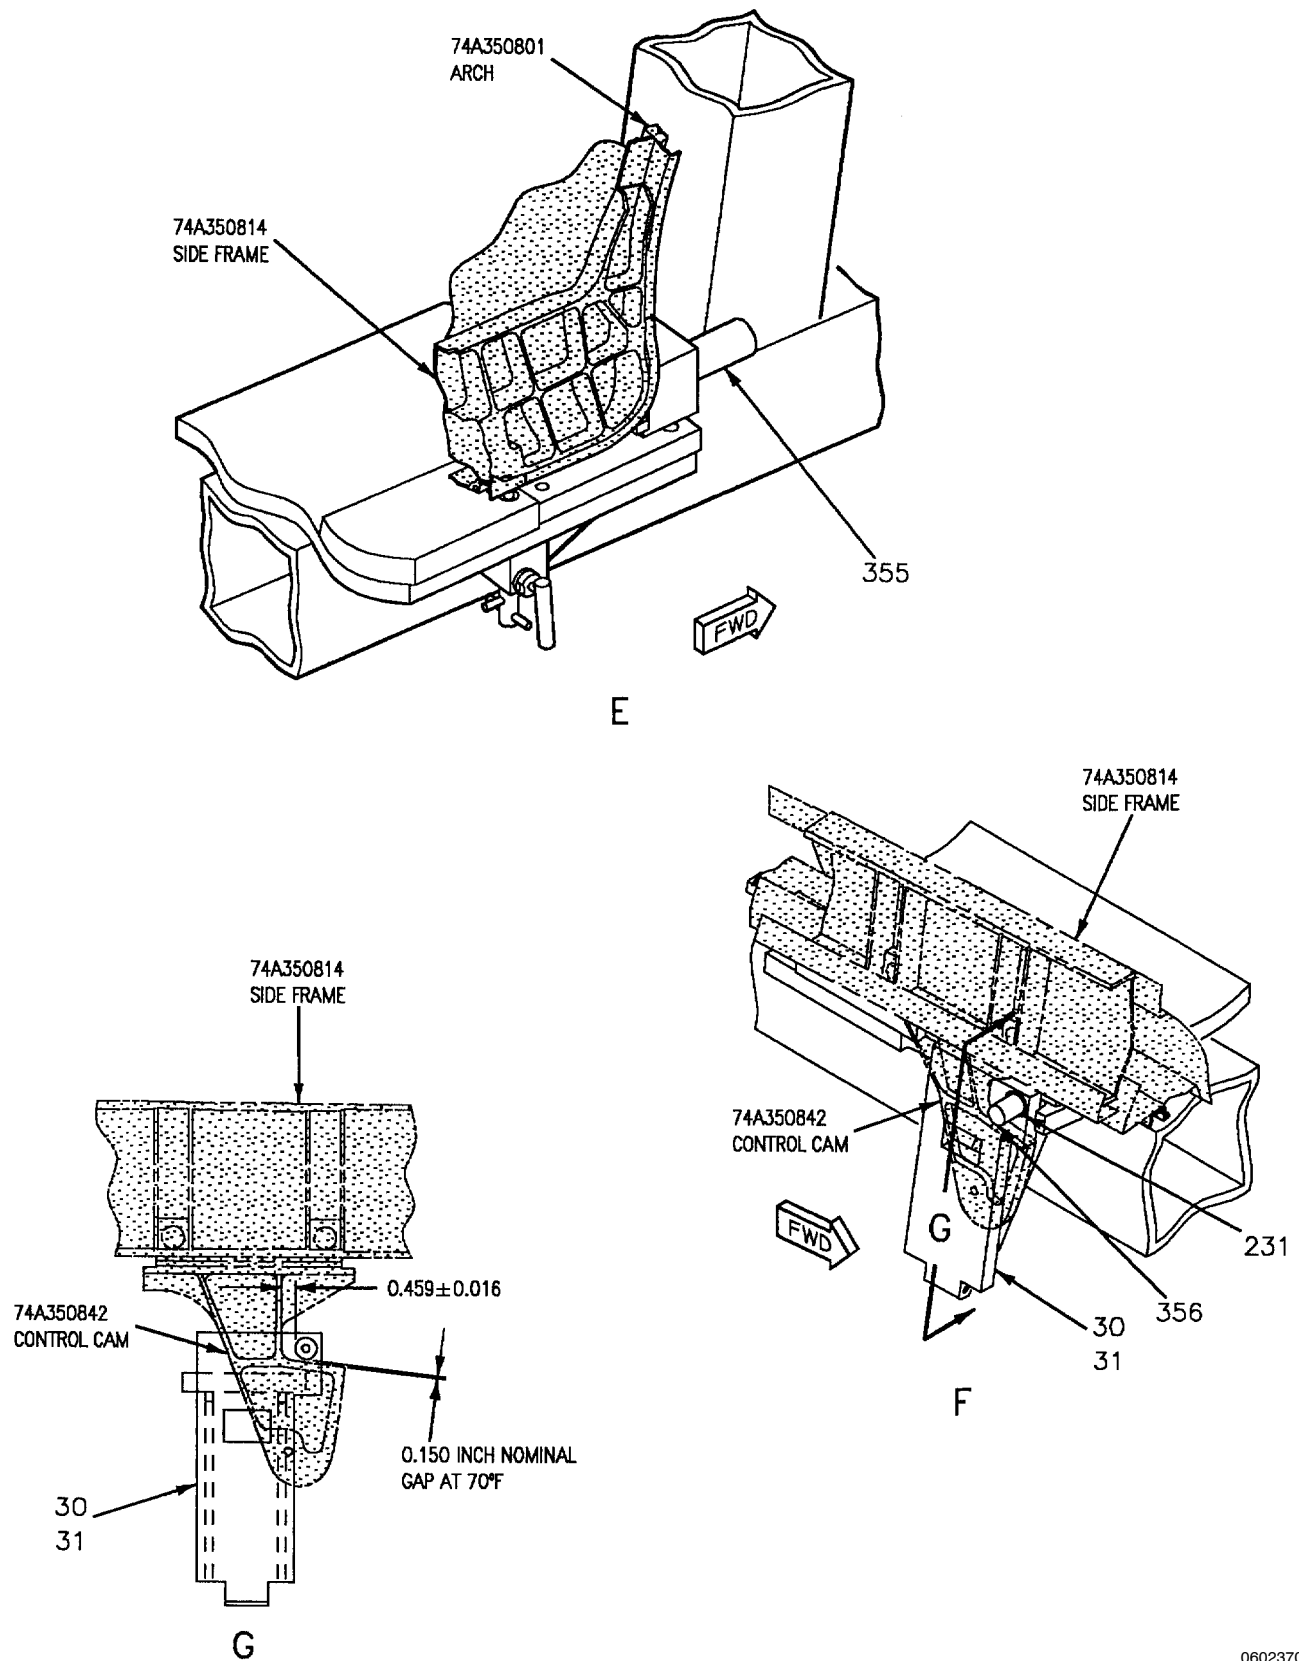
Replacement - Control Cam, Latch No. 5 (Sheet 4)
